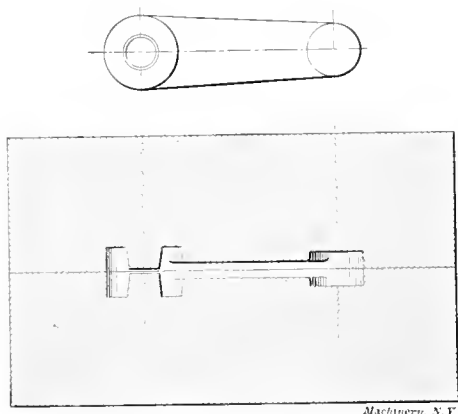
Construction of Die for Forging a Hole through a Boss.
